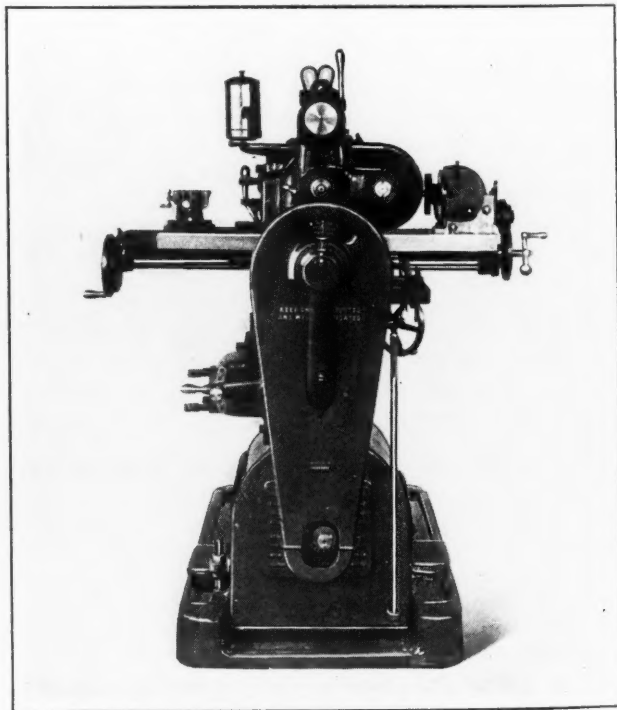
Rear View of Machine showing the Cast-iron Guard furnished for the Driving Chain
